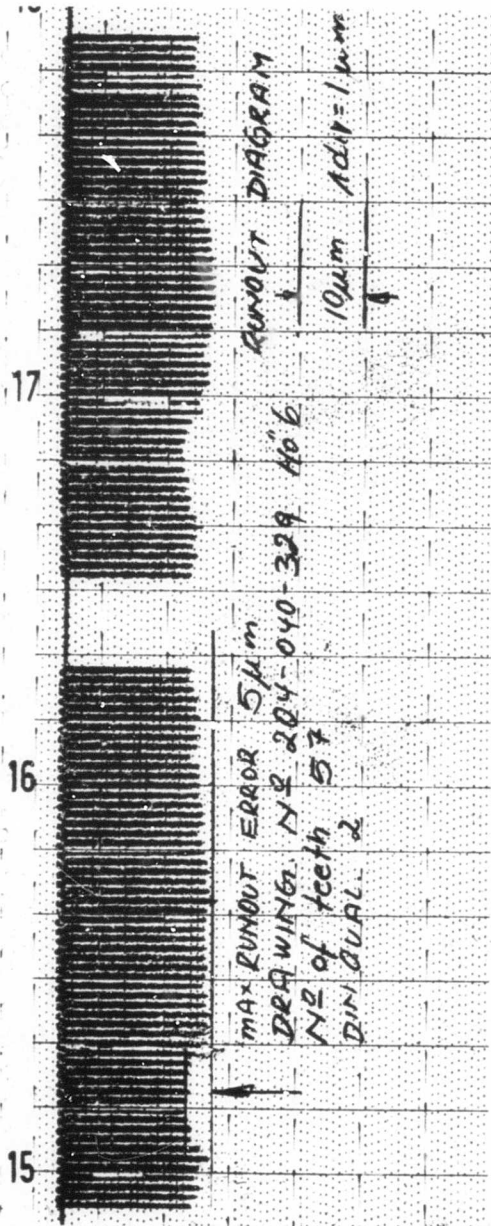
Runout Measurement of the Lower Planetary Stage Sun Gear as Measured on the Hofler Gear Measuring Machine.
